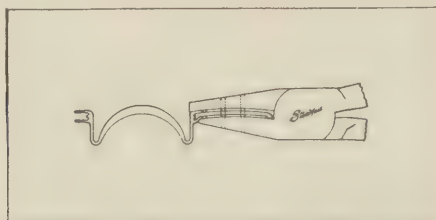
Detail of rimless strap after being reformed. Note relief or offset in strap on concave side.
